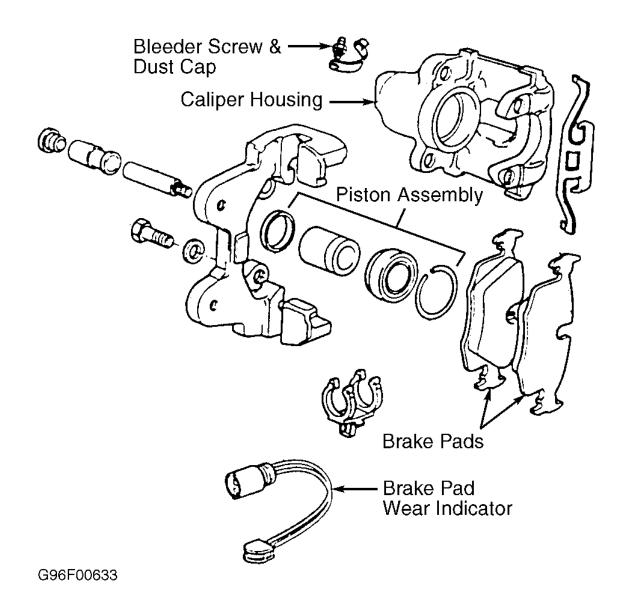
Exploded View Of Single Piston Caliper Courtesy of BMW OF NORTH AMERICA.
